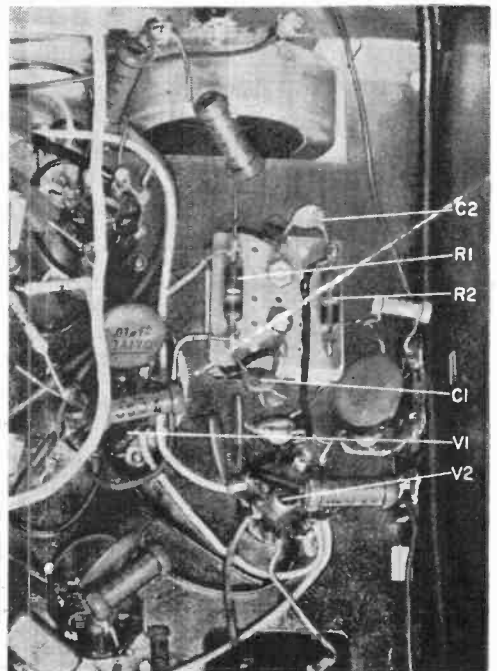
After the first i.f. transformer is removed, the mechanical filter subassembly is installed, and held in place by two screws. The board should be made small-enough to pass through chassis opening.
